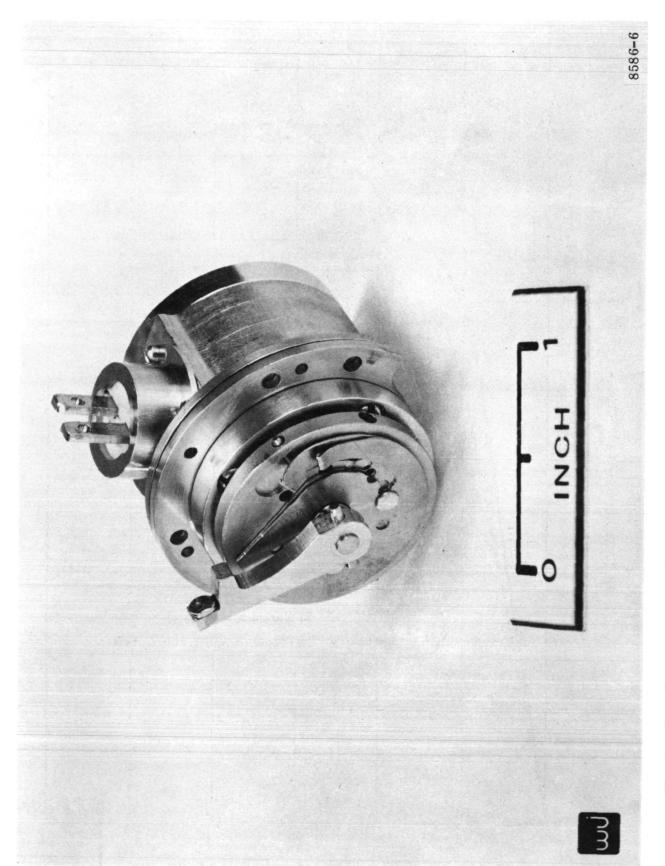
Complete motor assembly showing driving elements and locking arm.
